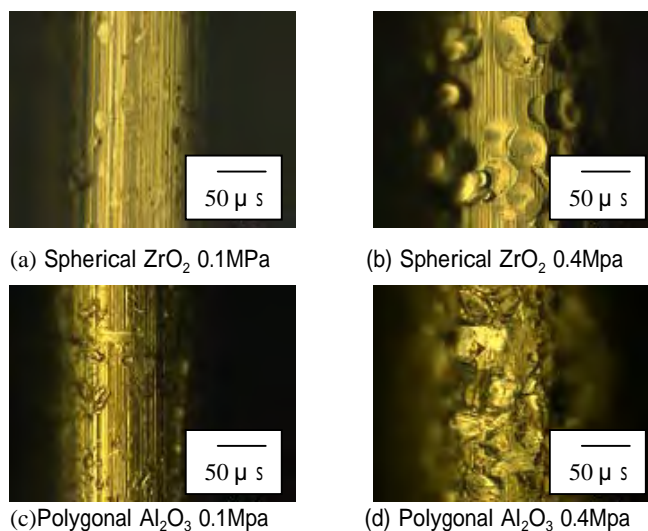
Rugged shape of wire tool electrode surface after wet blast treatment
